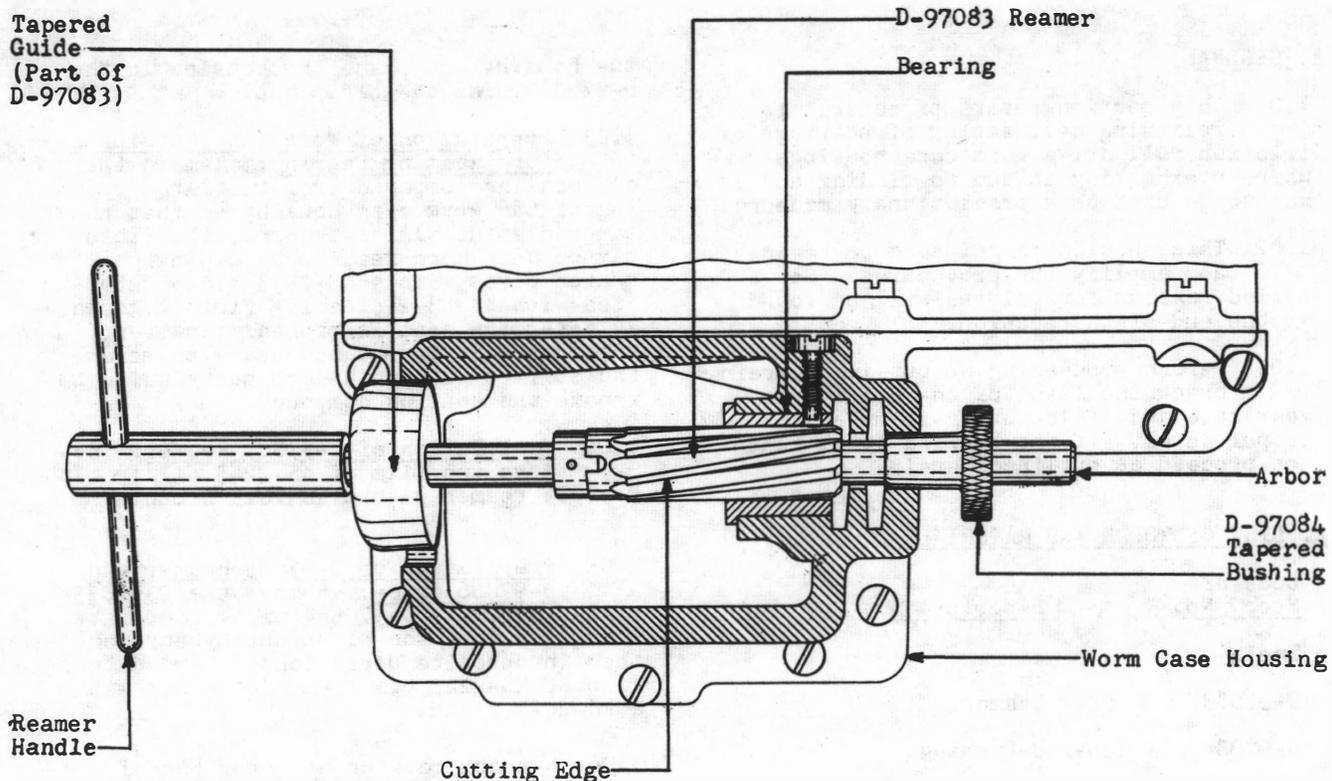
Reaming Bearing at Motor End of Worm Case Housing
